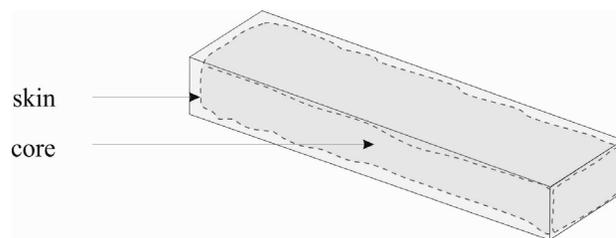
Schematic illustration of specimen with visible outer (skin) and inner (core) part.
